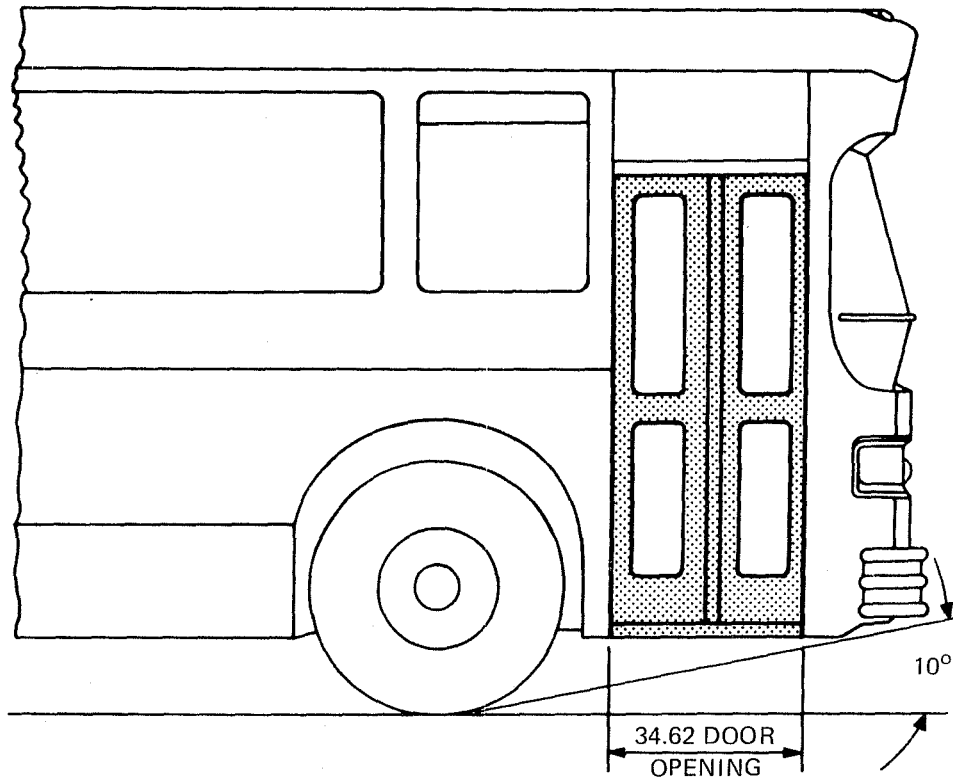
ENTRY DOOR SIZE CONSTRAINTS
